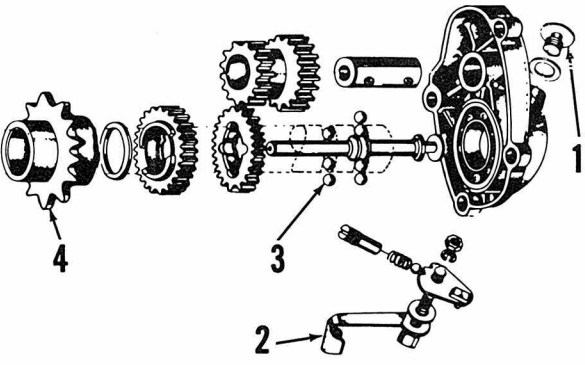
Exploded view of two speed gear box used on G4TR and 100E models.
